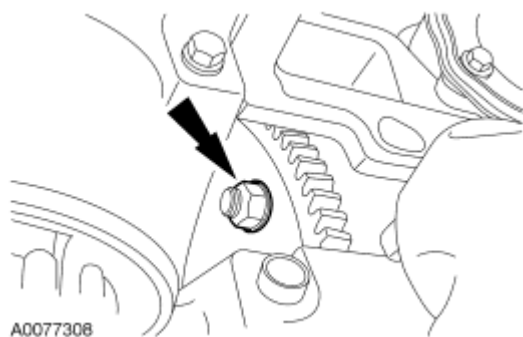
Locating Torque Converter-To-Flexplate Nuts
